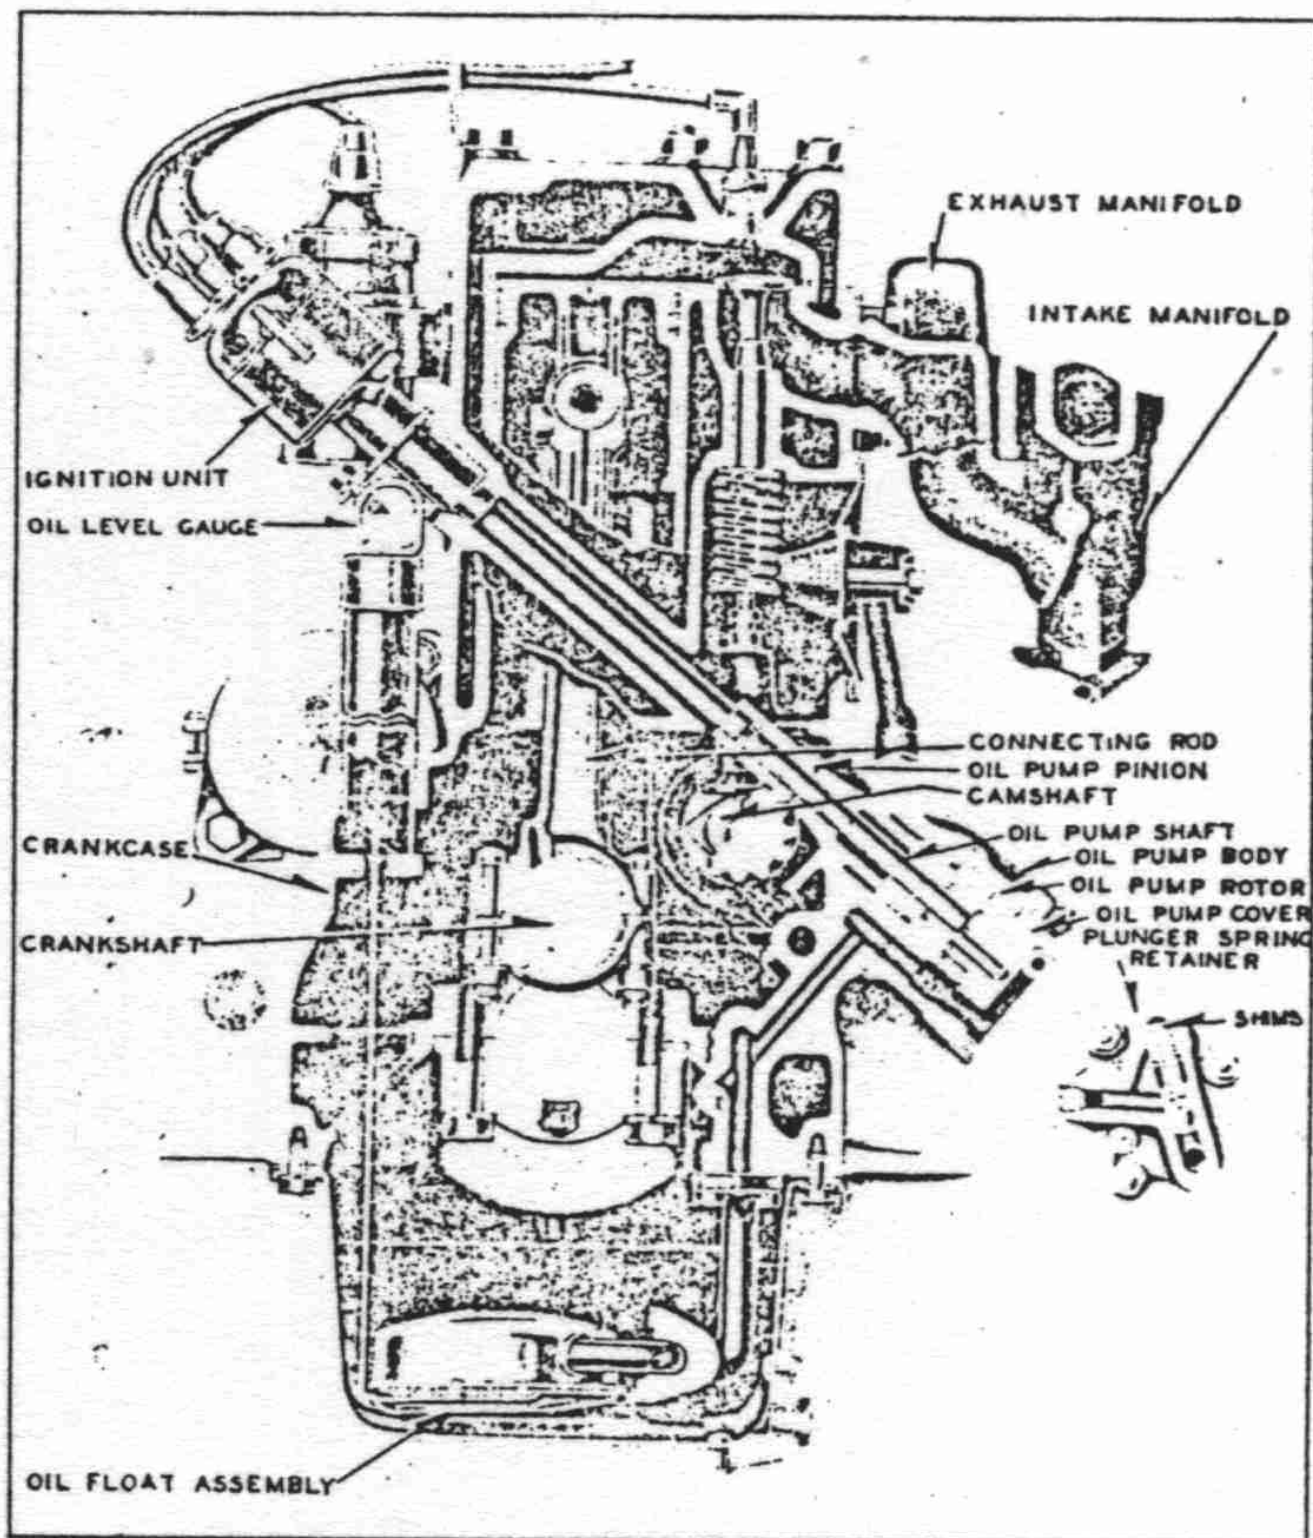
FRONT SECTIONAL VIEW OF ENGINE
